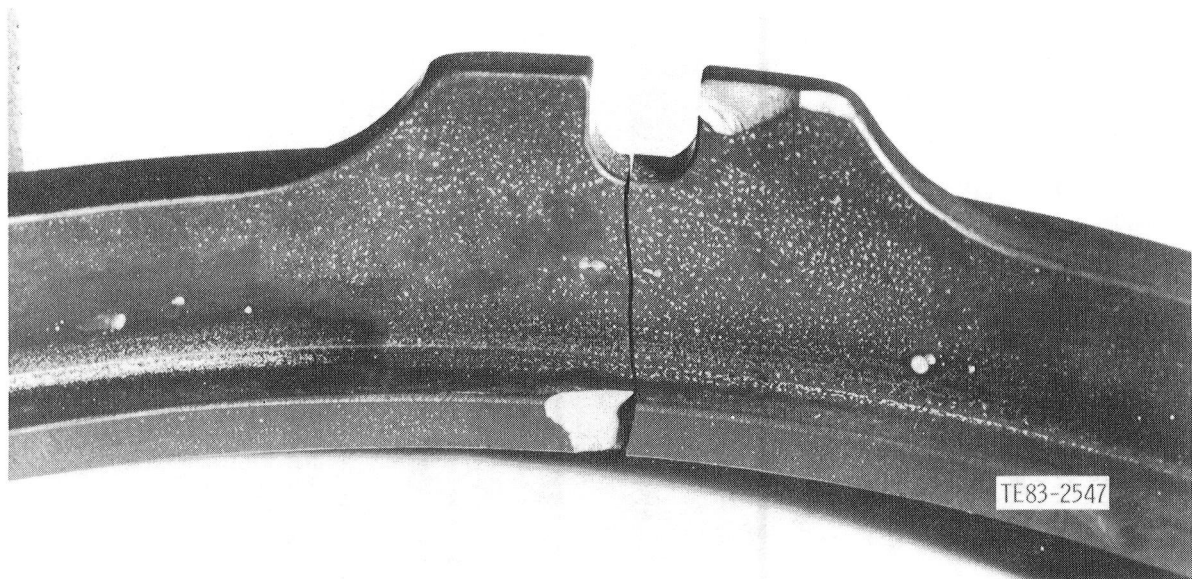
Cracked inner vane support ring for engine C-4, TD14.
